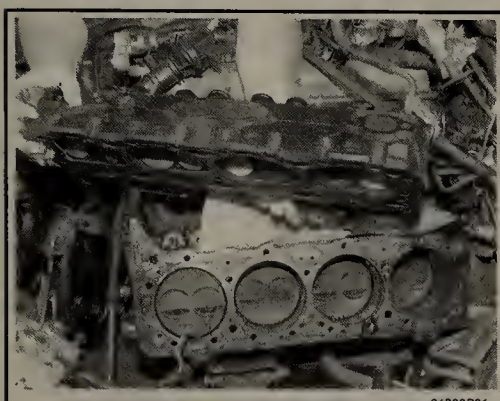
Carefully lift the cylinder head off of the engine block and place on a suitable workbench
